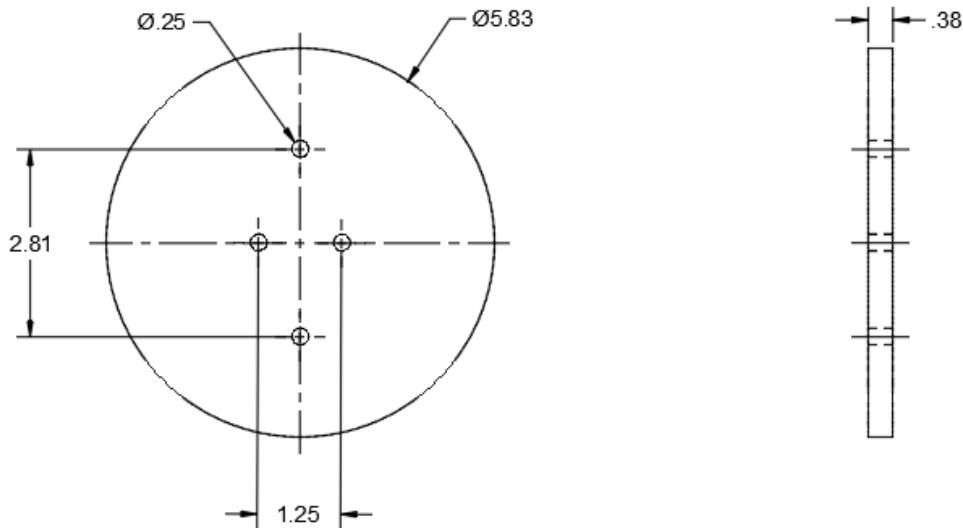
Avionic Retention Bulkplate Dimensioned Drawing
